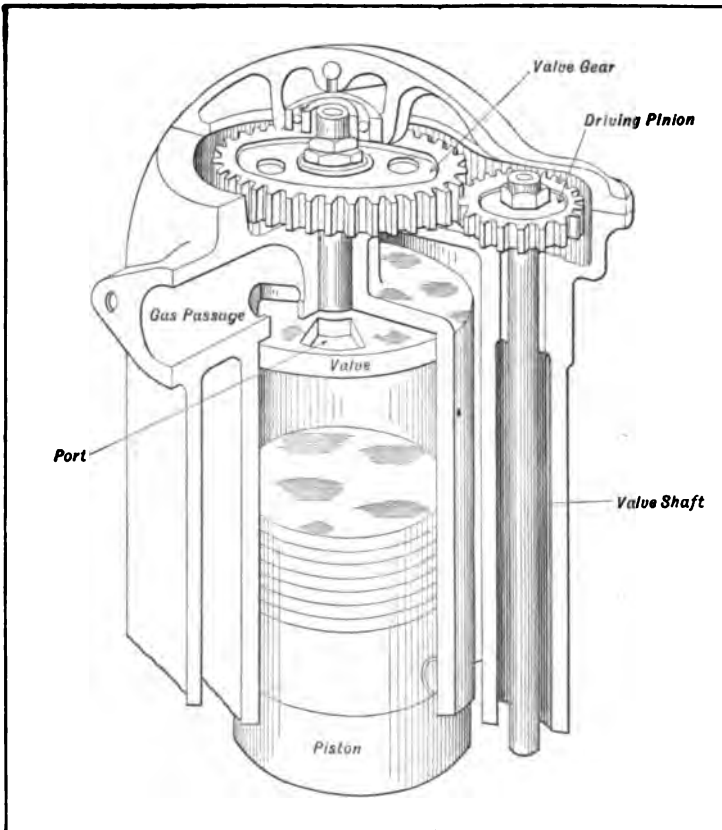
Partial section of Reynolds rotary valve motor cylinder, showing method of rotating simple disc valve and ports in cylinder head.
